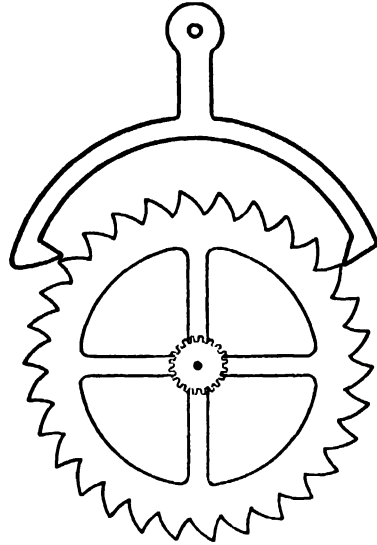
A. ANCHOR ESCAPEMENT OF A CLOCK
